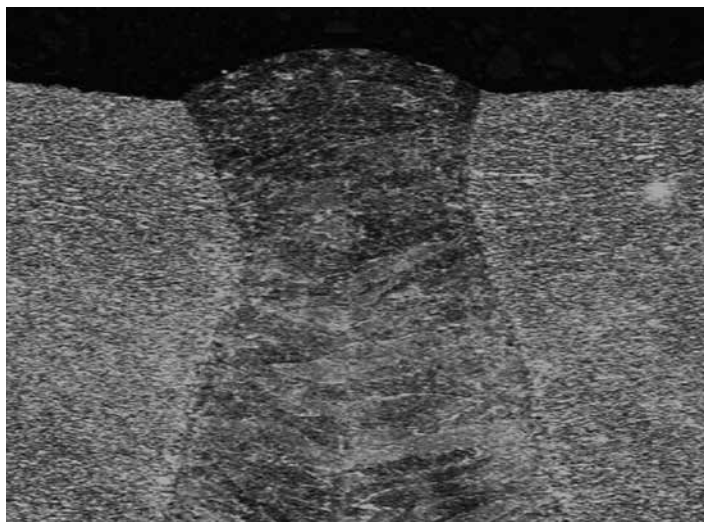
The microstructure of a laser welded ZERON 100 SDSS tube. Courtesy, Rolled Alloys.
